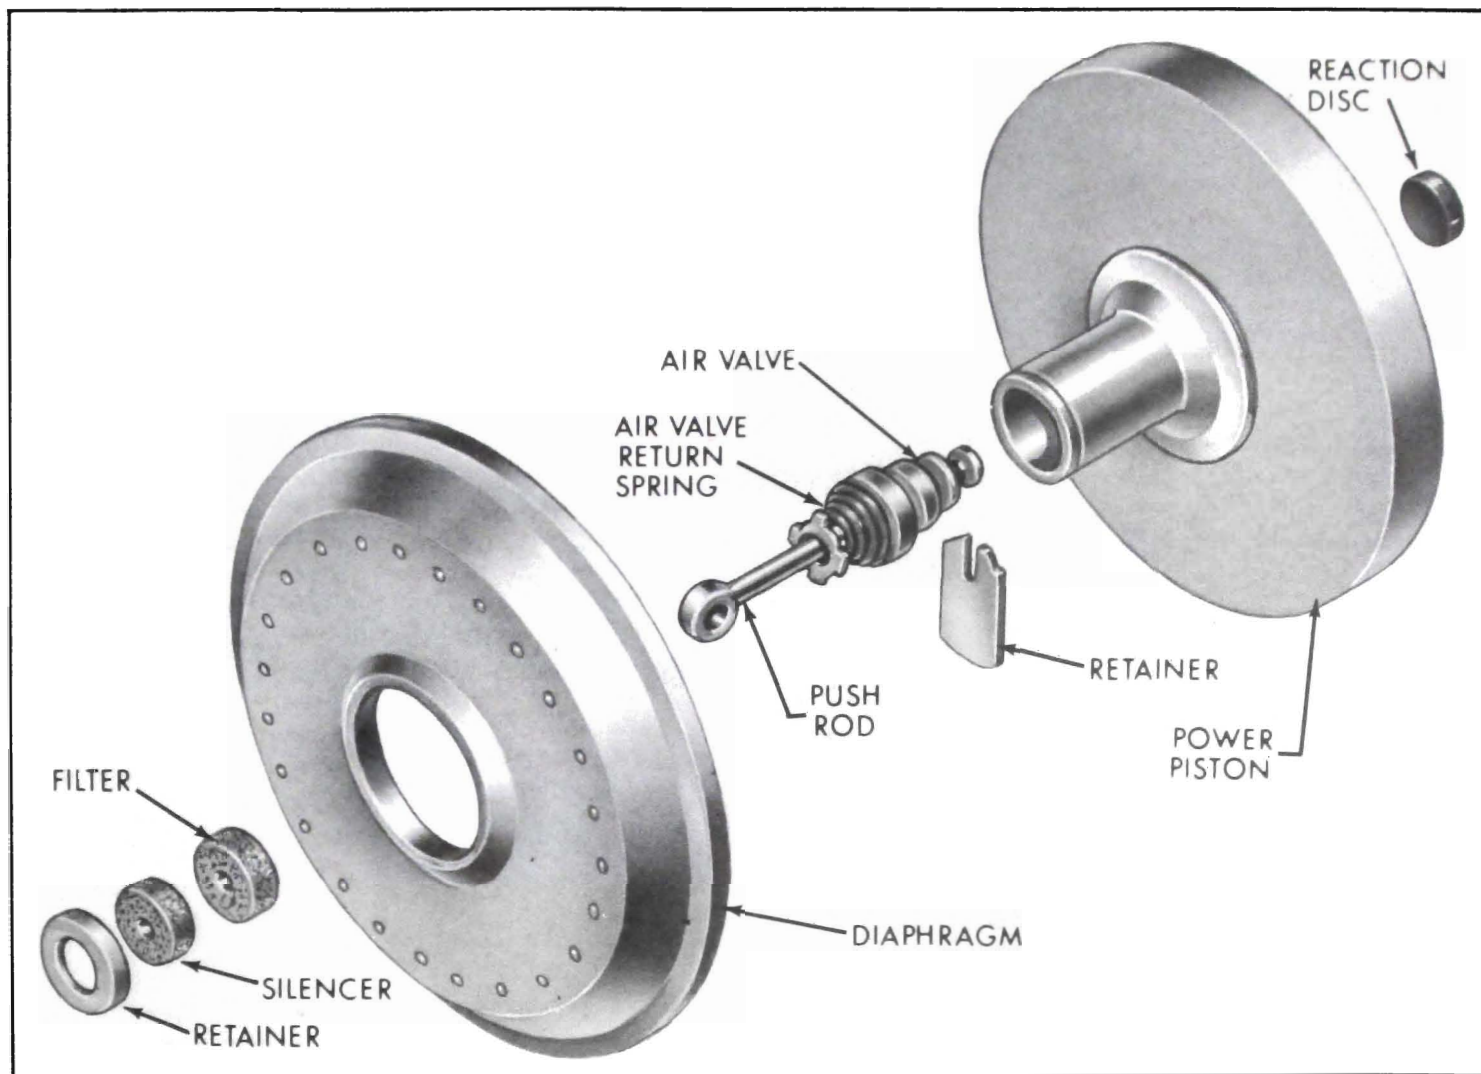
Removal of Air Filter, Diaphragm, Lock Key, Valve and Rod Assembly and Reaction Disc
